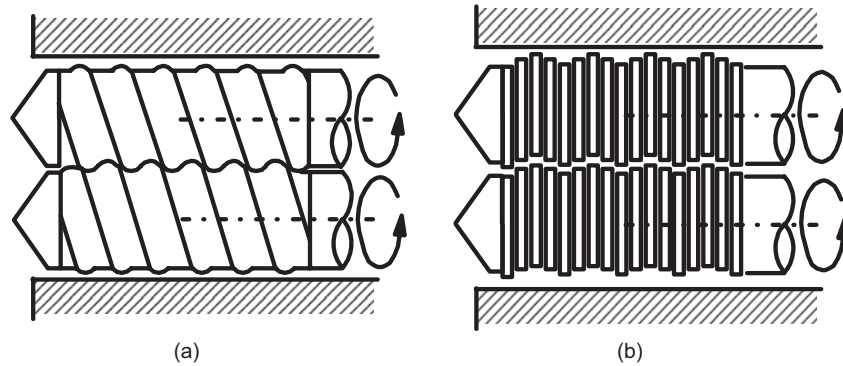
Corotating screw extruder. (a) self-wiping intermeshing screw elements. (b) self-wiping intermeshing kneading block elements.
